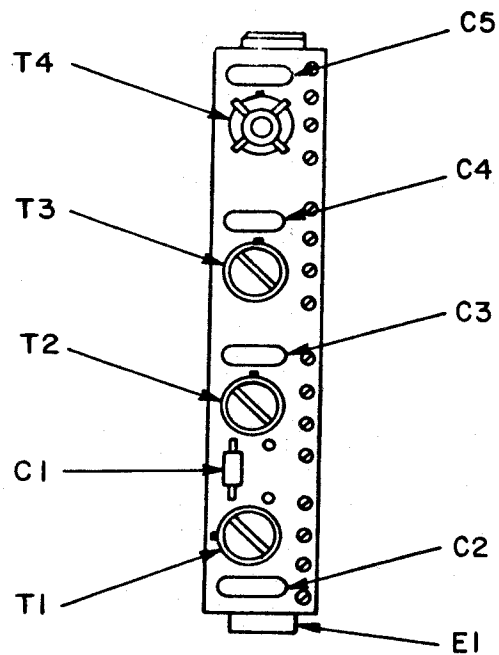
25 MHz Subassembly A2A4A15, Component Locations
